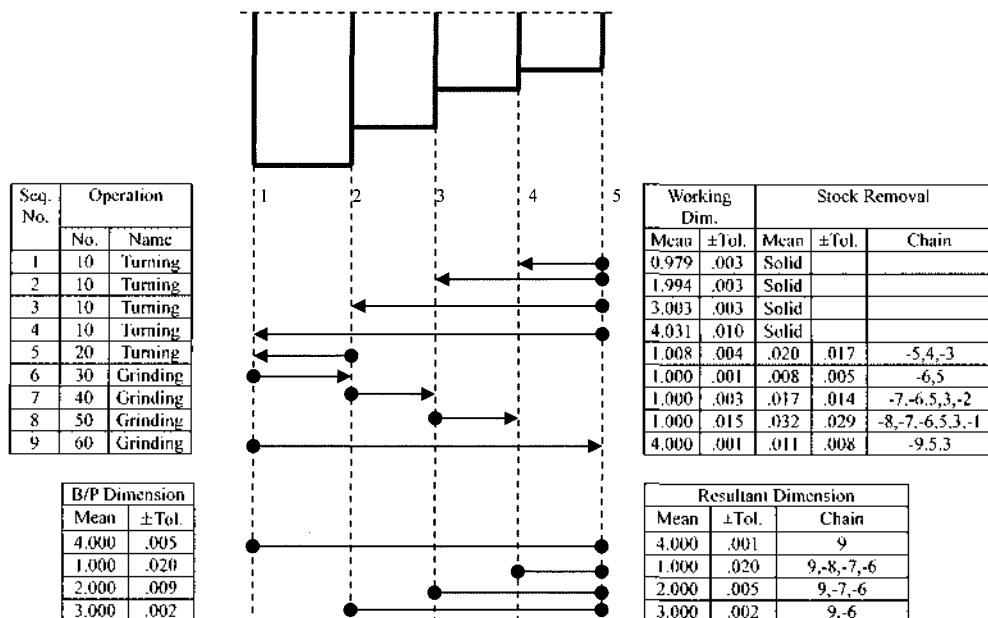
Tolerance chart for the machined steel plug.
